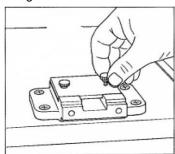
Unscrewing thumbscrews from wire retaining plastic plate
